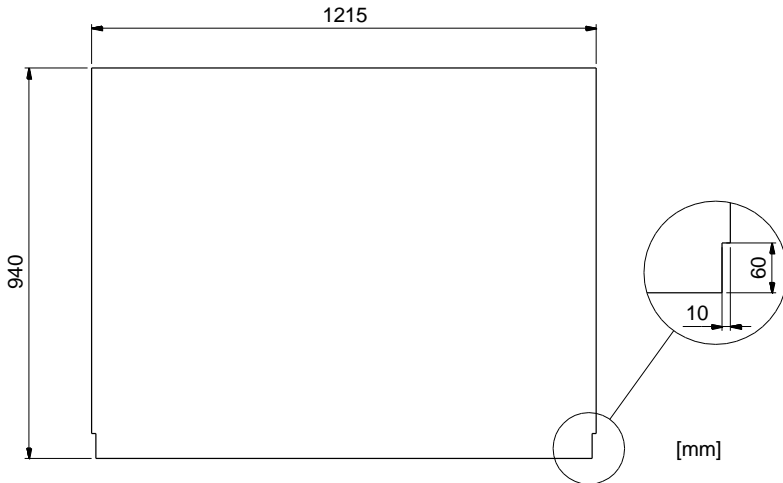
Dimension of the GRAVEL SIDE BOARD (Art.11539). Note that the board has got notches in both the bottom corners.
